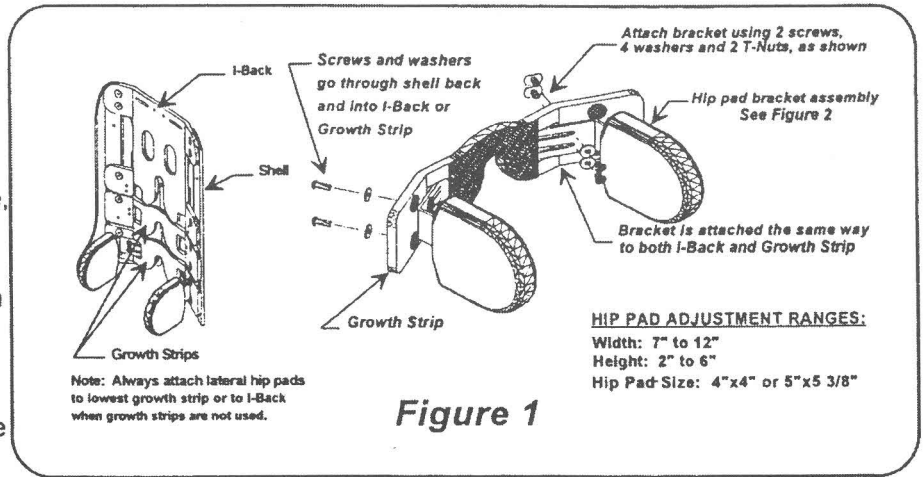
illustrates the correct assembly of the hip pad brackets onto the I-Back or Growth Strip. Use the hex tool provided with the unit to assemble, adjust and tighten these components.
